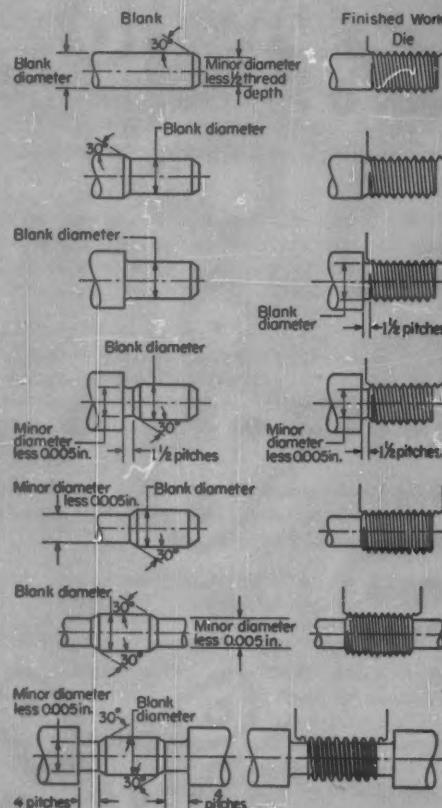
Recommended blank design for rolled threads, showing use of necked areas to provide maximum thread length
